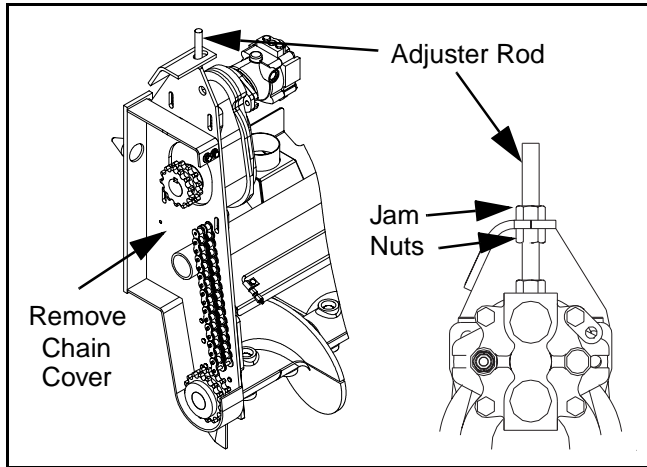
36 Adjusting Spreading Auger Drive Chain
